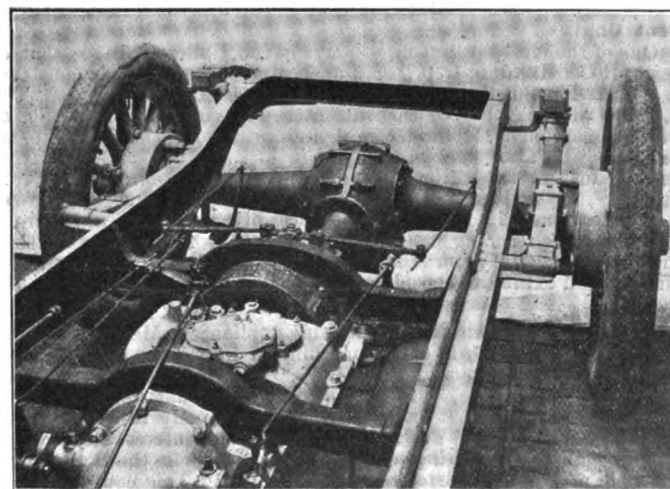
Rear View of Chassis of Panhard 15-20-h.p. Live Axle Car.
